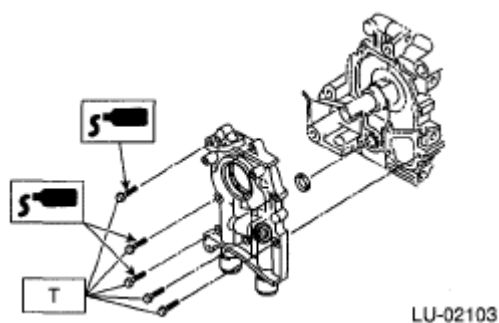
Applying Liquid Gasket To Three Bolts Thread
